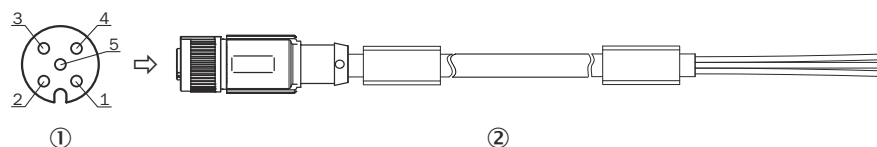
Adapter cable, e.g., part no. 6053720 (5 m)
